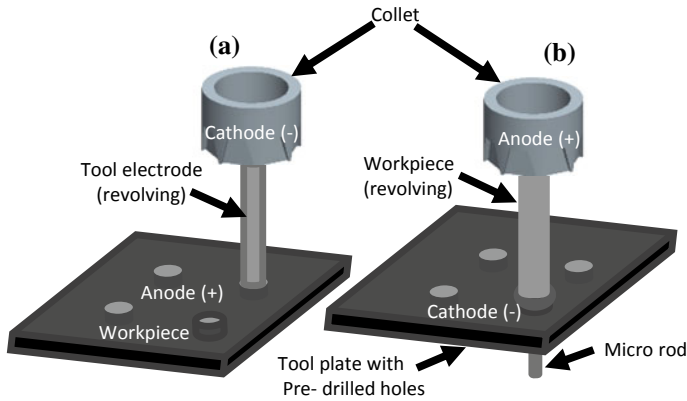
Tool workpiece orientation in a μ EDM-drilling and b R- μ EDM [8]
